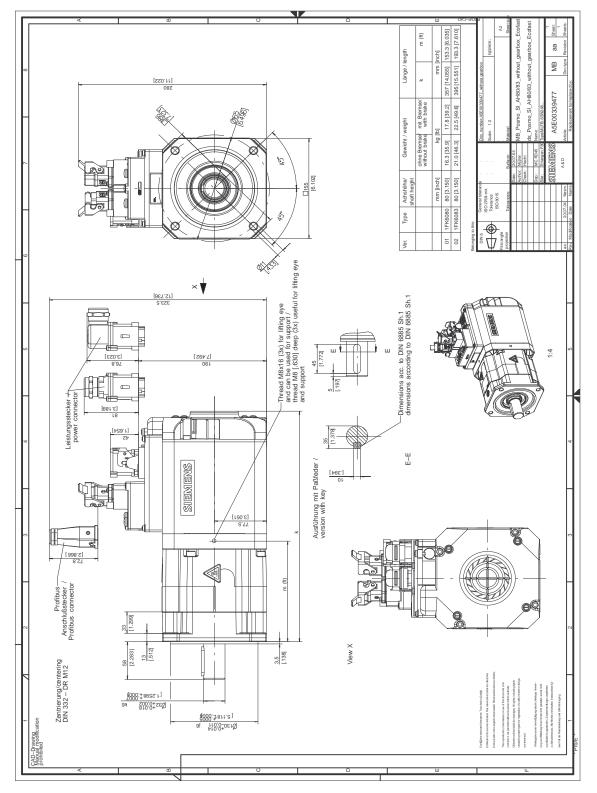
Dimension drawing POSMO SI 6SN248 –2CF 0–1G 0
